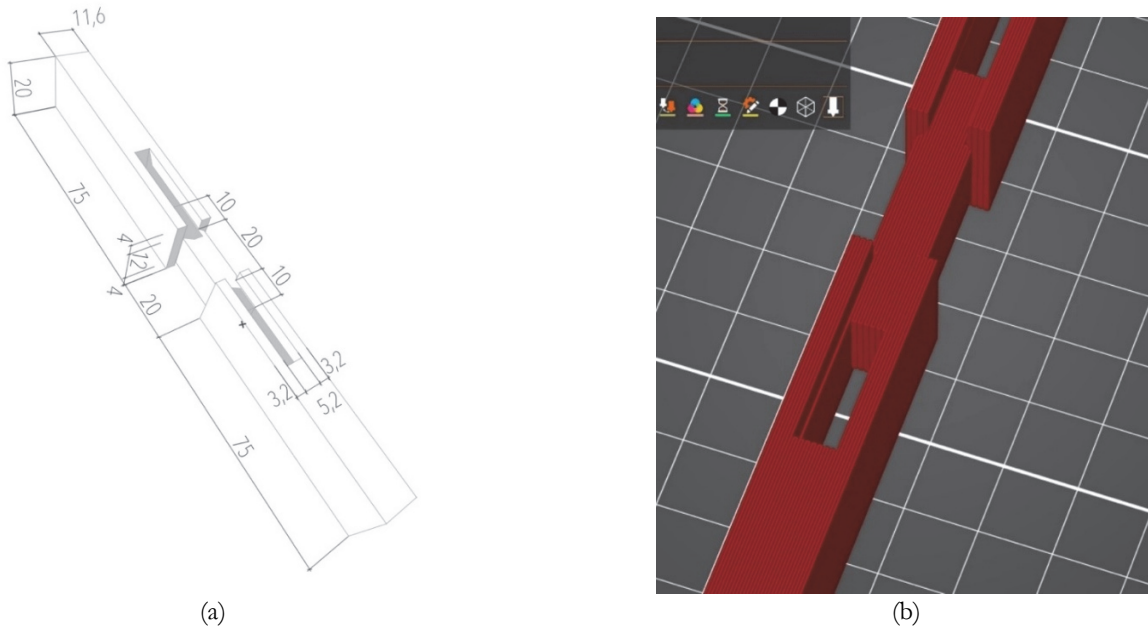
Special printed 3D element of model B (a) dimensions, (b) detail of layers.
